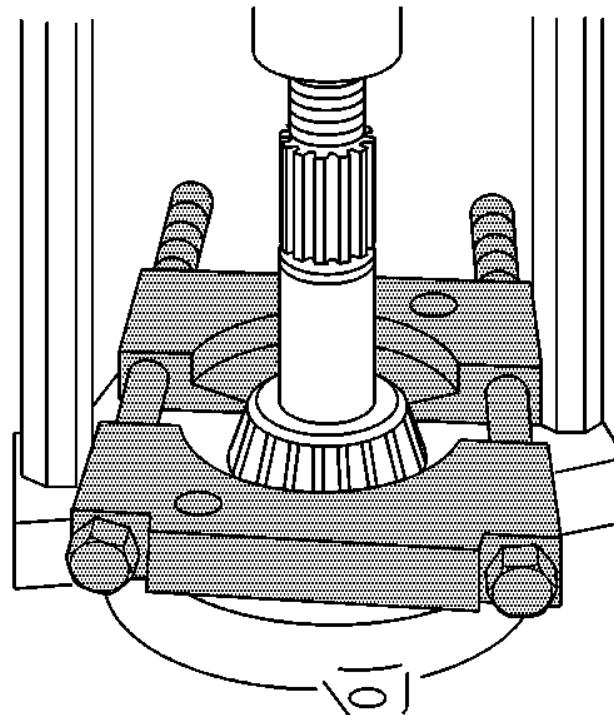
Inner Pinion Bearing And Hydraulic Press
